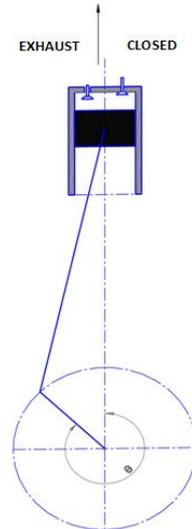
Crank-Connecting Rod - Piston Mechanism in Exhaust Stroke
